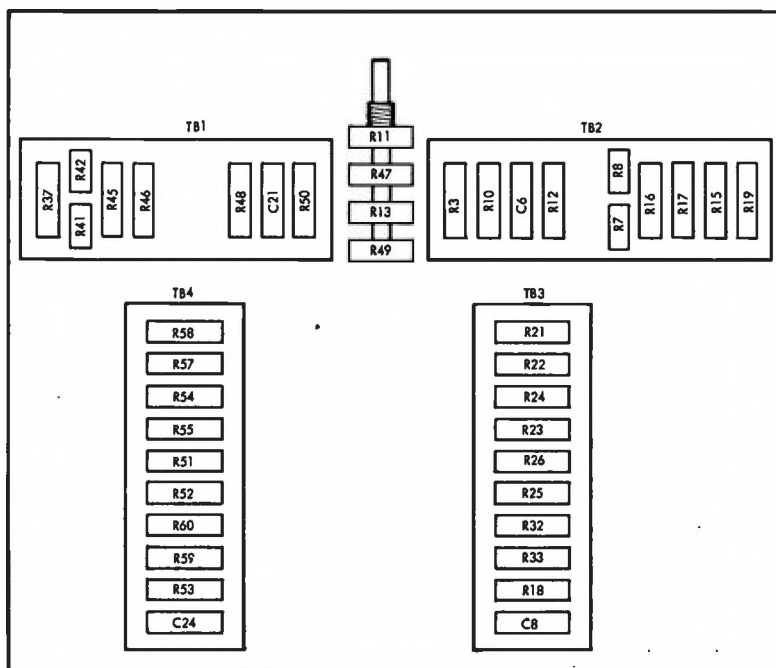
Layout of components on the resistor mounting boards, and the indicated sections of the crossover-frequency control.
